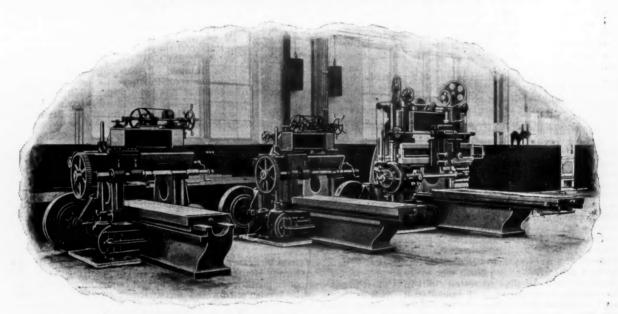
Group of Ingersoll Milling Machines Driven by Motors on the Bed.
